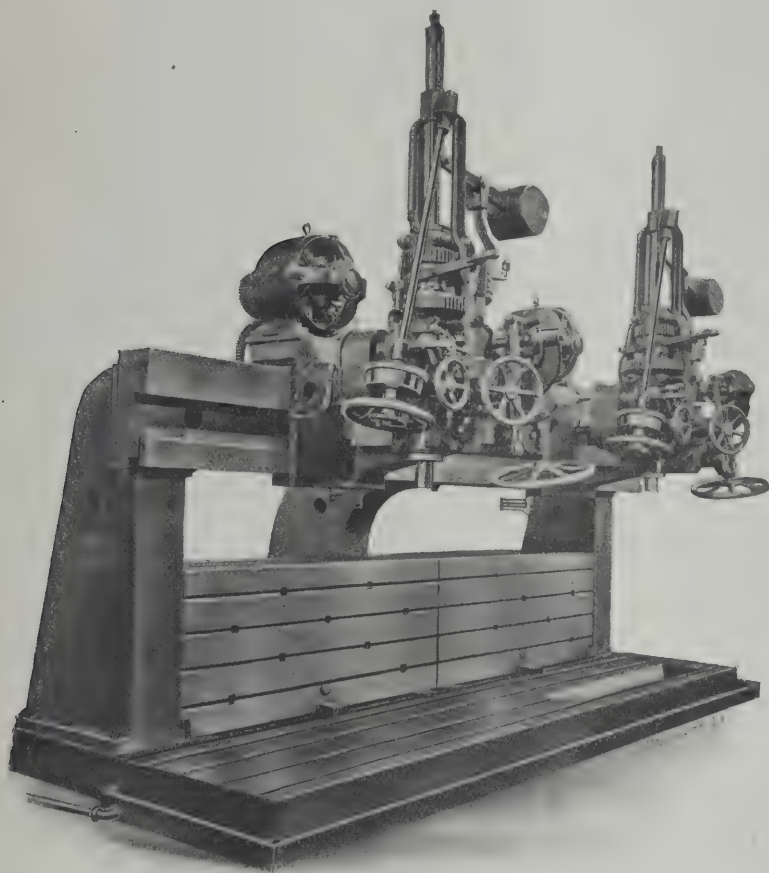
Front View of Newton Two-spindle Locomotive Frame Drilling Machine
